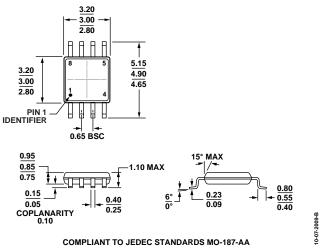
8-Lead Mini Small Outline Package (MSOP) (RM-8) Dimensions shown in millimeters
